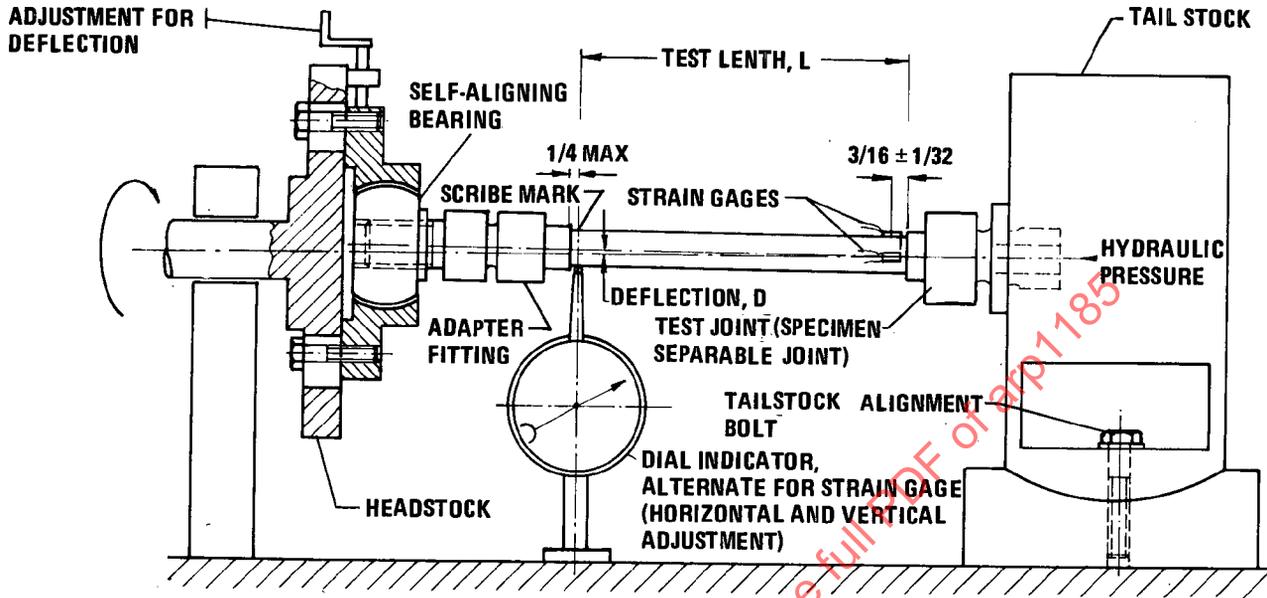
ROTARY FLEXURE TEST SCHEMATIC
